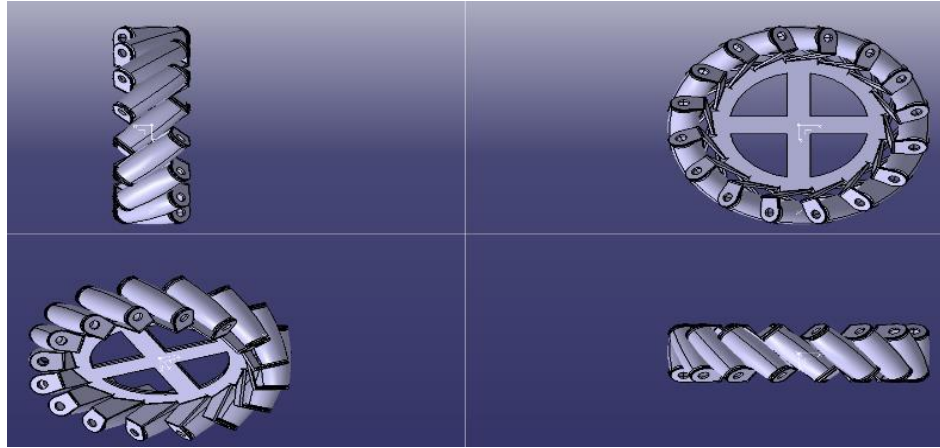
4-View of Mecanum Wheel Designed in GSD Workbench
